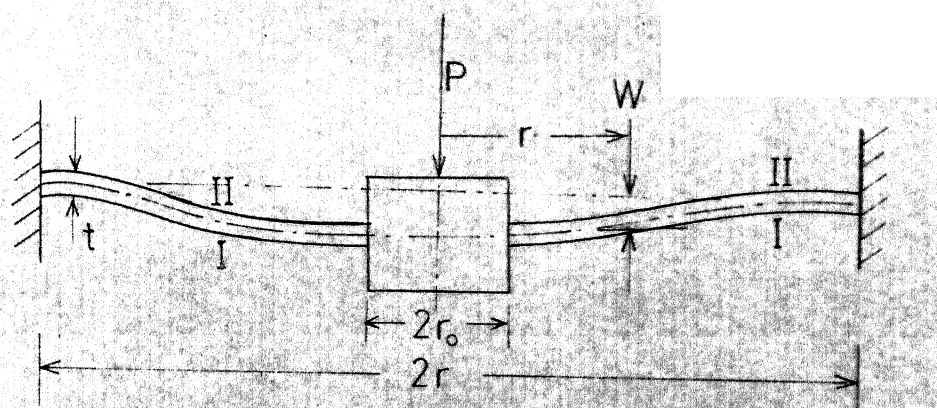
Schematic view of deflection of the disc dynamometer due to the drawing force
